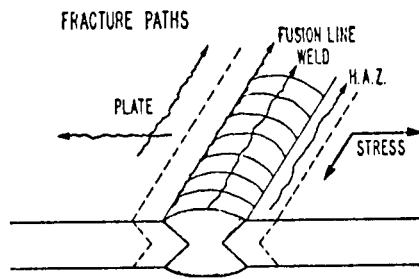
Possible paths of brittle fracture in weldments.
